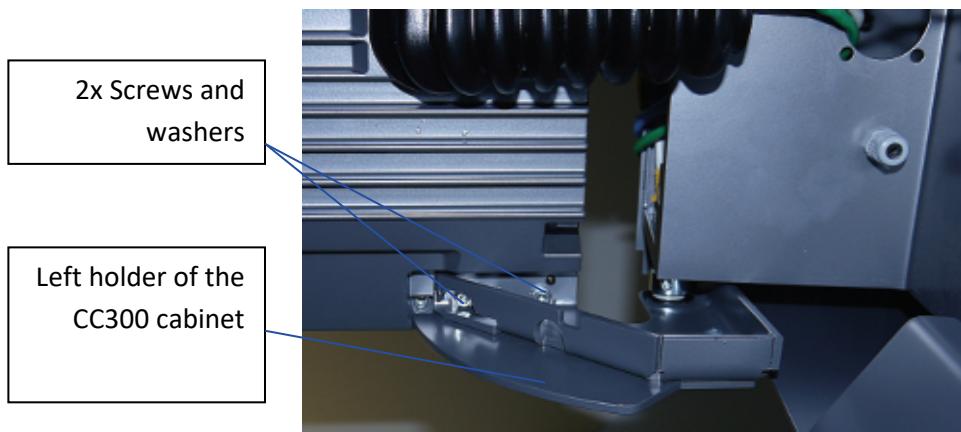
Mounting the CC300 Operator Panel to the left holder
